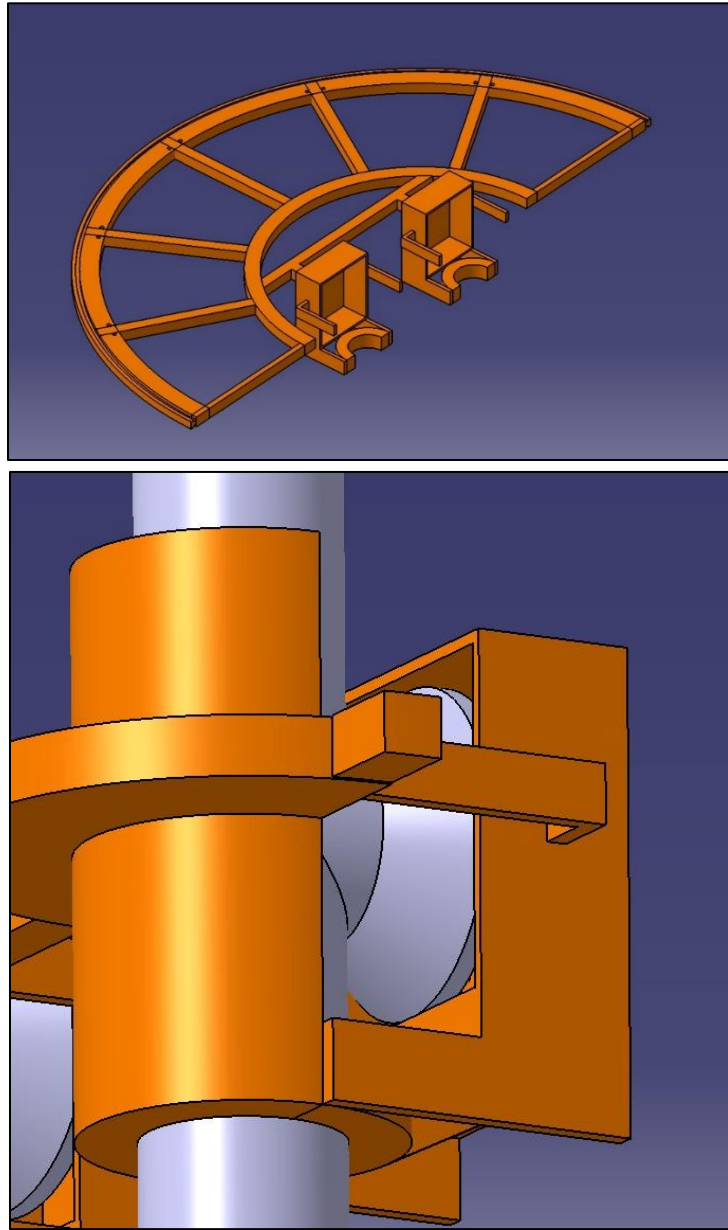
The Isometric View of ISS Boom Fixtures Box-Shaped Version (Top) and the Side View of the Fixture with the ISS Booms in Position (Bottom).
